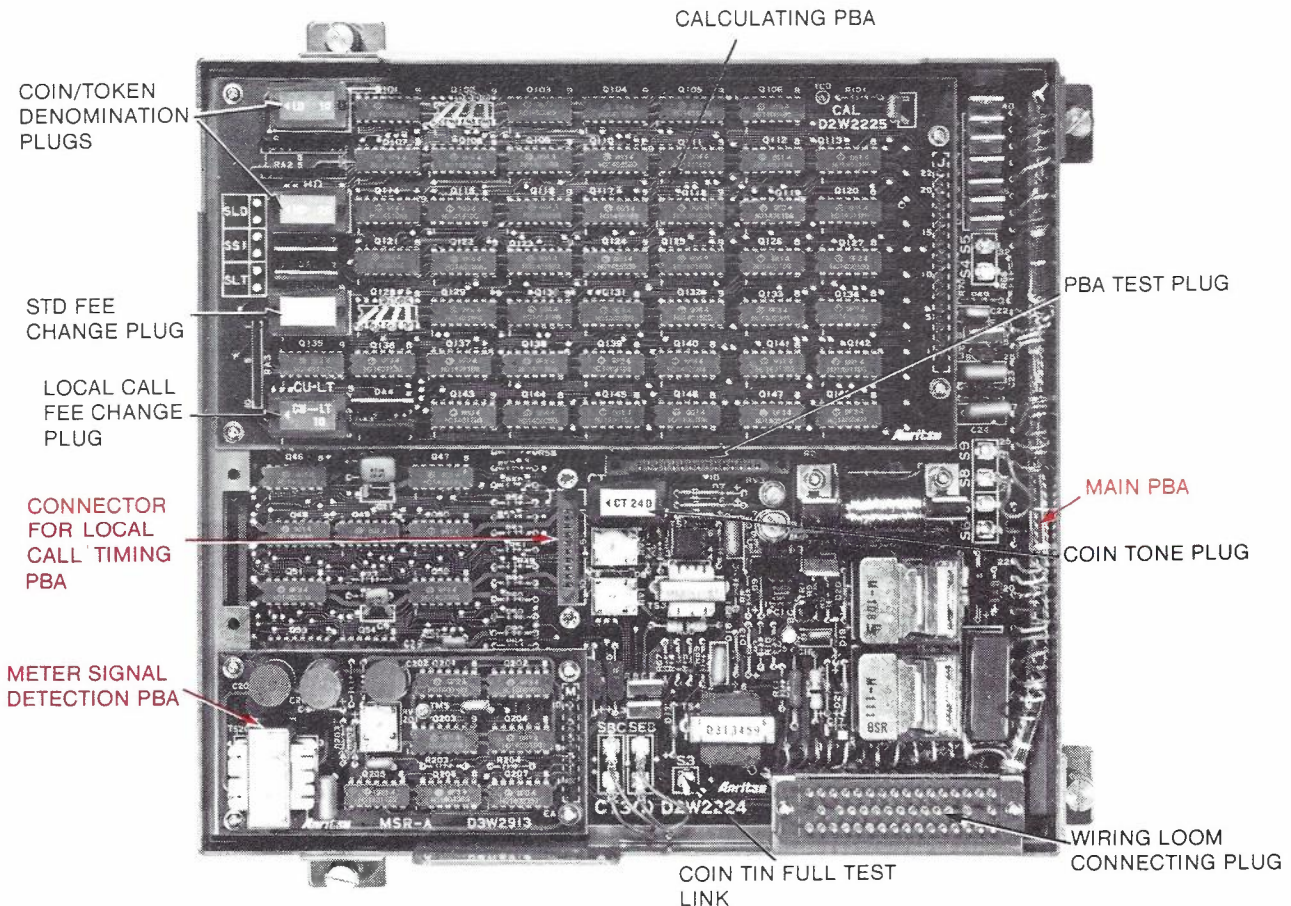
Printed Circuit Board Assembly — CT3(I).
